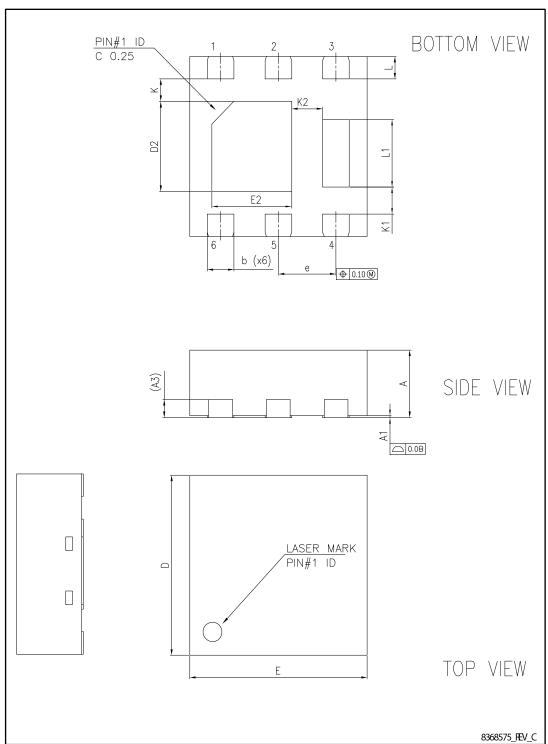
Drawing dimension PowerFLAT[™] 2 x 2
